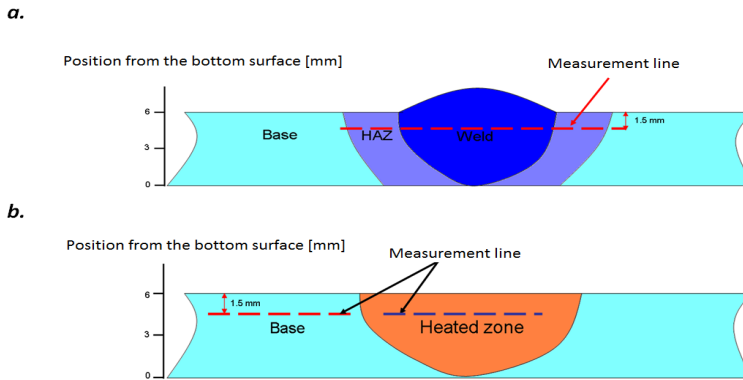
The cross section of the welds in conventional welding and welding with additional heating.
